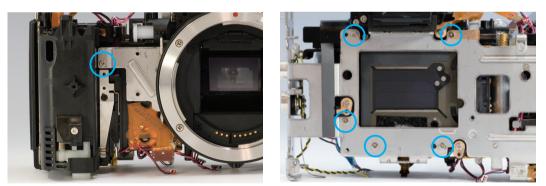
Position of Mirror Box Ass'y Screws (FrontFig. 062 Position of Mirror Box Ass'y Screws (Back)
